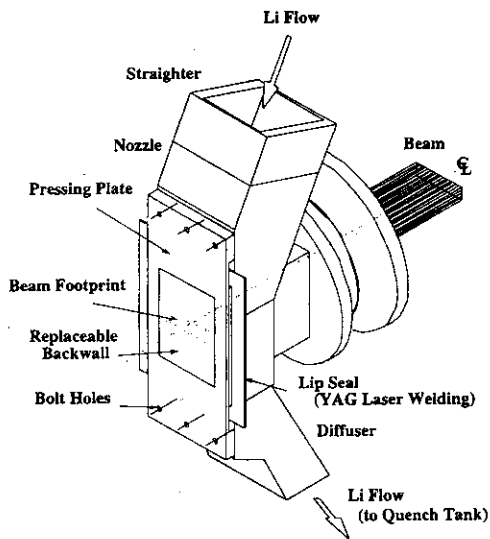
Replaceable Backwall Attachment Scheme (Bolt-Fix, Welding-Seal Type)
